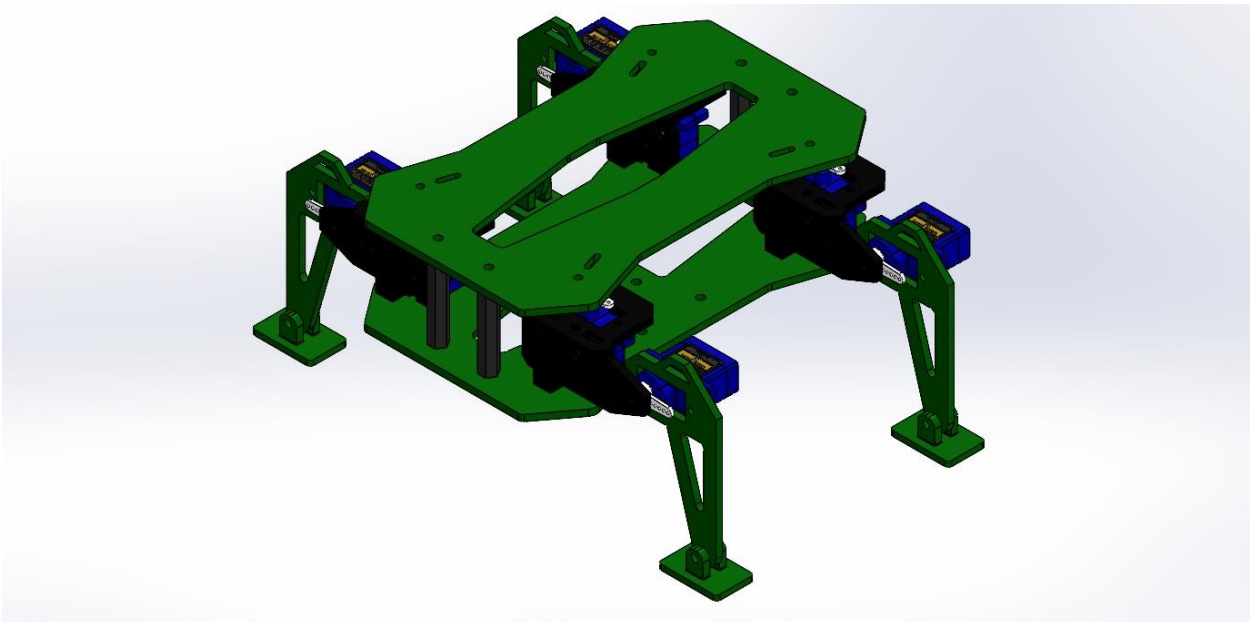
Original robot design. All green colored parts were 3D printed in the University of Akron printing lab while the black parts were from the Adept robot kit.
